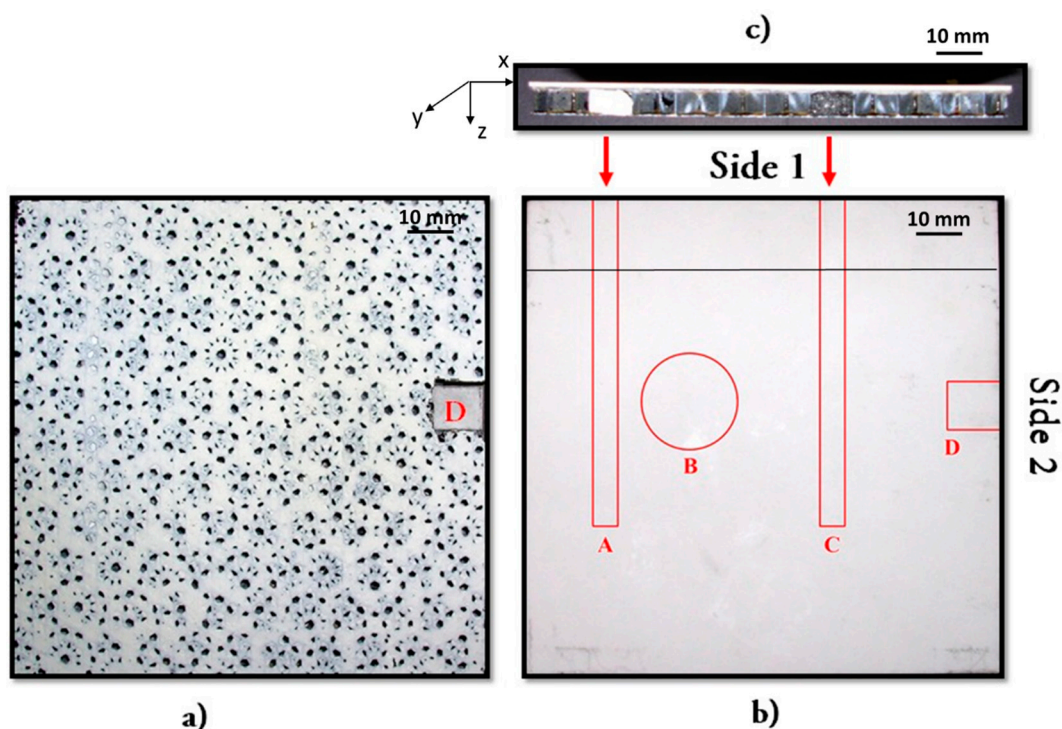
Test sample: (a) Rear view showing the sandwich structure; (b) Top view showing the alumina ceramic plate, defect B, and fabricated defect D in side 2; and (c) lateral view showing cross-section of the fabricated defects A and C (already anticipated in (b)).
